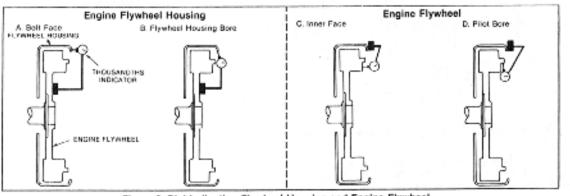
Dial Indicating Flywheel Housing and Engine Flywheel
